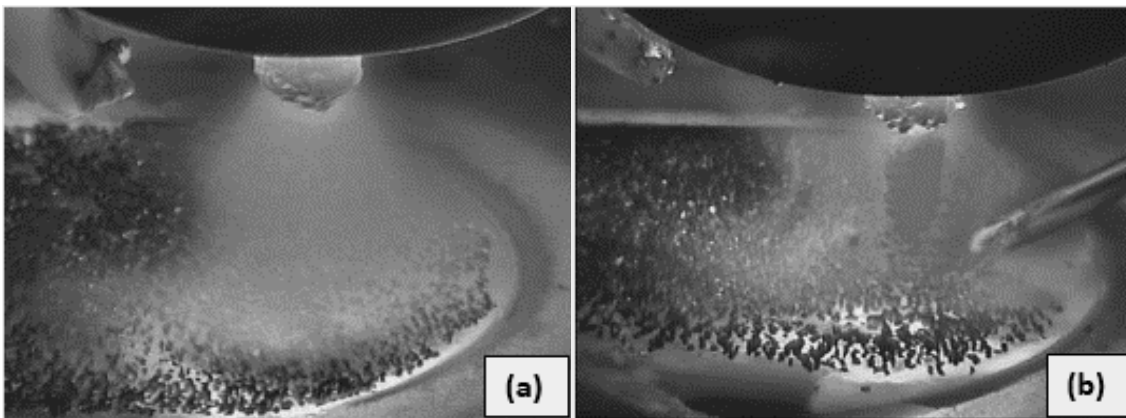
Images of autogenous and filler wire added weld seam tracks during 150 μm SiC particle injection (HI = 1.6 kJ/mm; V_{SiC} = 2.9 m/s; PFR = 22 g/min): (a) autogenous weld seam (b) Filler wire (WFS = 2.8 m/min)
